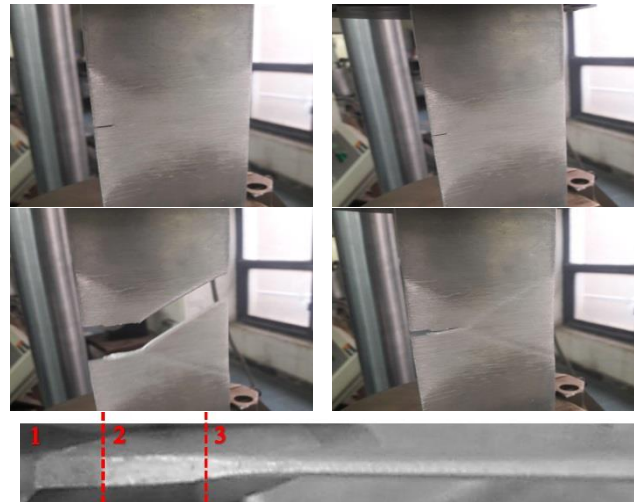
Fracture steps in the fatigue test-the beginning of the test (top right), the actual cracks (top left), the growth of the cracks and the end of piece thinning (middle right), the final failure and separation (middle left) and fatigue fracture breakdown section in the simple sample (down)
